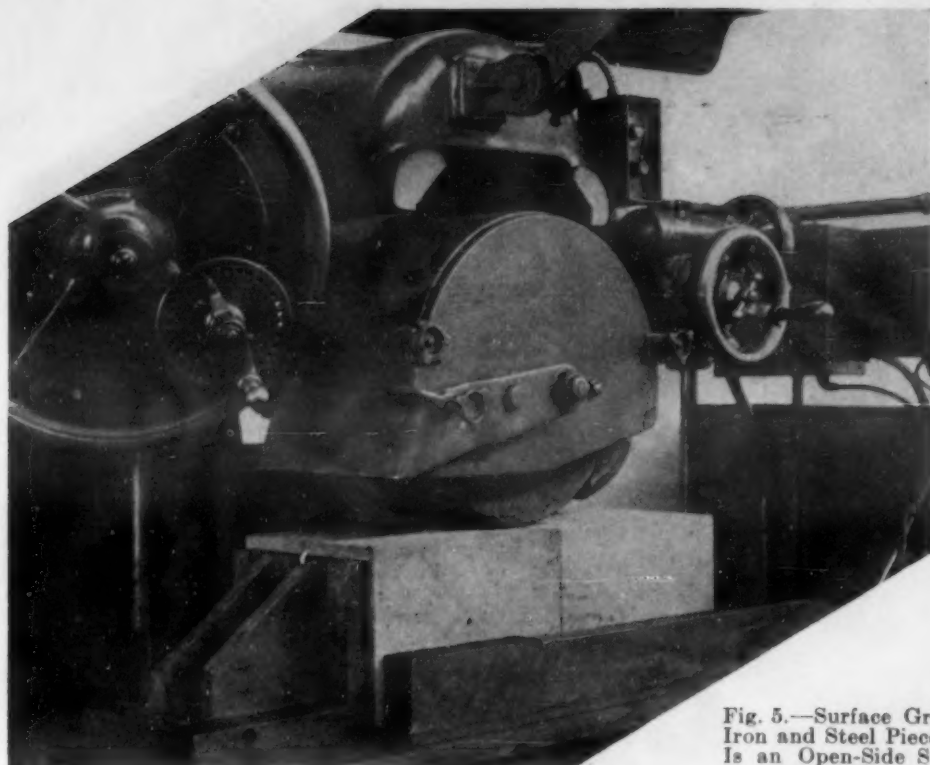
Surface Grinding Set-Up of Refractory Blocks on a Magnetic Chuck. Iron and Steel Pieces Around the Blocks Hold Them in Place. The Machine Is an Open-Side Surface Grinder Equipped with Hydraulic Table Traverse
